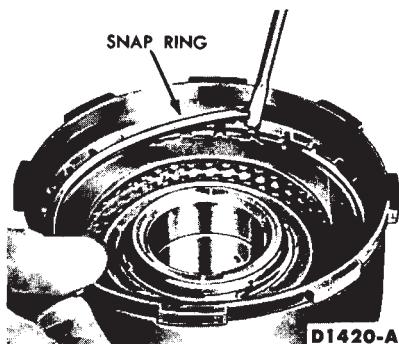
Removing or Installing Reverse-High Clutch Pressure Plate Snap Ring
